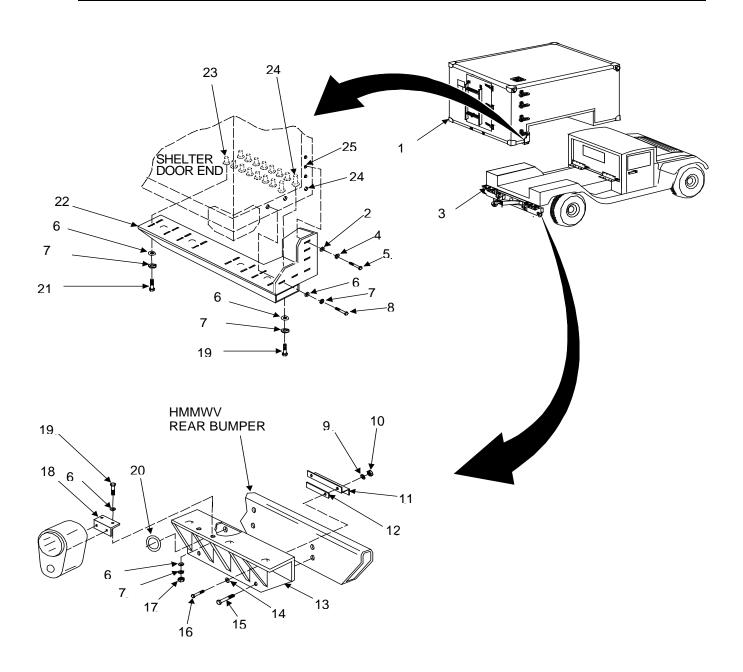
Shelter Mounting Assembly - Rear Brackets (Sheet 1 of 2).
